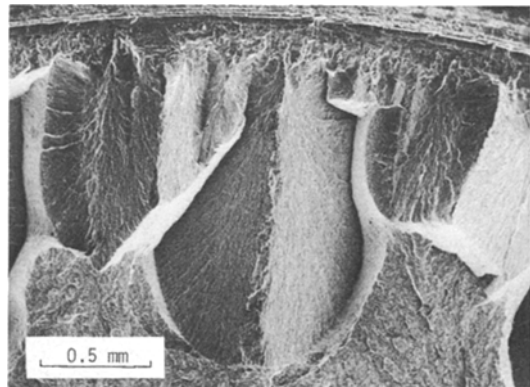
Detail of the “factory roof” fracture surface shown in Fig. 3. Note the flow lines on the roofs, indicating Mode I crack propagation.
